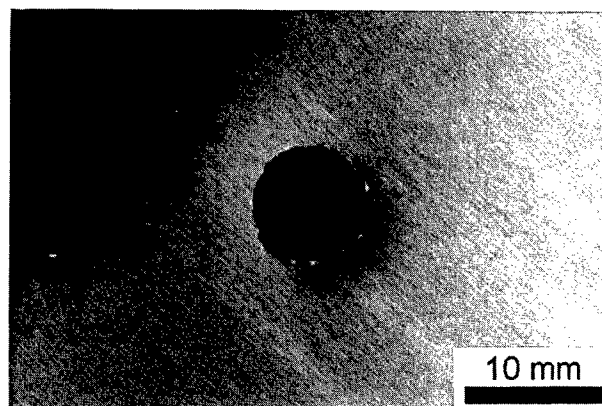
IM Ti-47Al-2Cr-0.2Si sheet impacted at room temperature shows penetration instead of brittle fracture.
